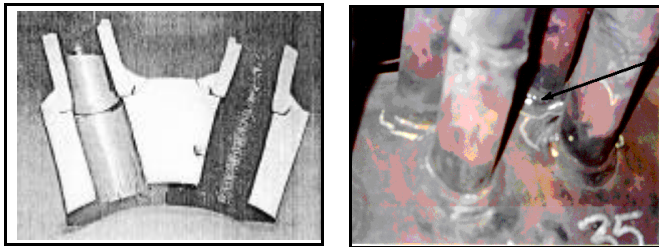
Internal (courtesy of EPRI) and External stubweld cracks
